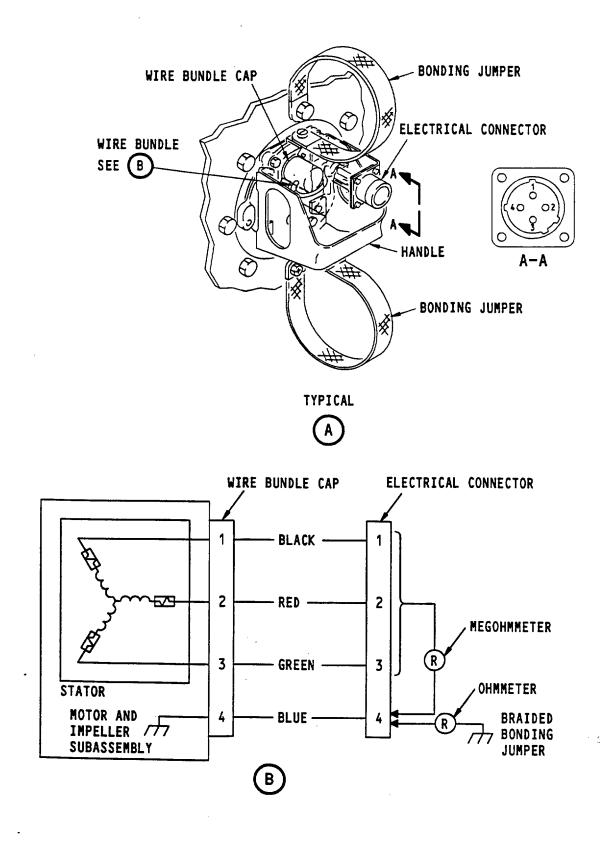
AIRPLANE FUEL PUMP INSPECTION
